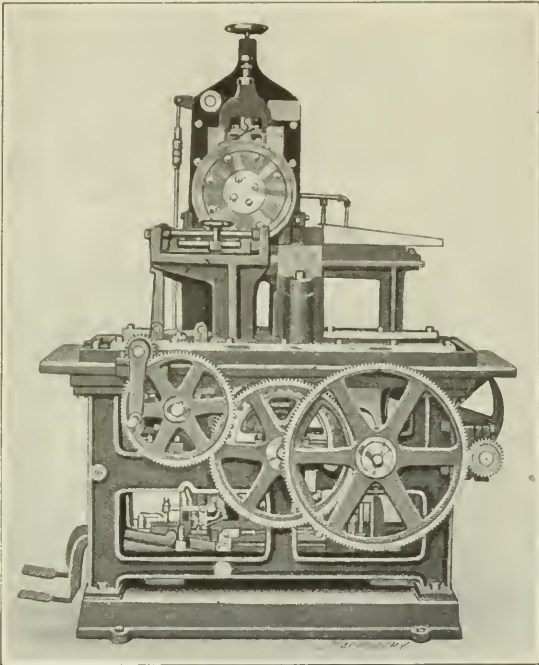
Special Thomson Electric Seam Welder used principally for lap-welding Coffee Pots, etc.
